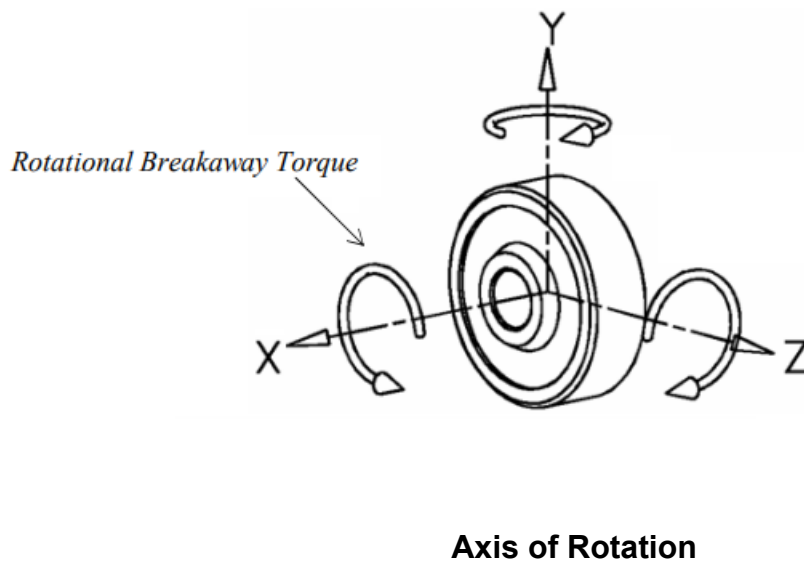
Bearing No Load Rotational Breakaway Torque Check
